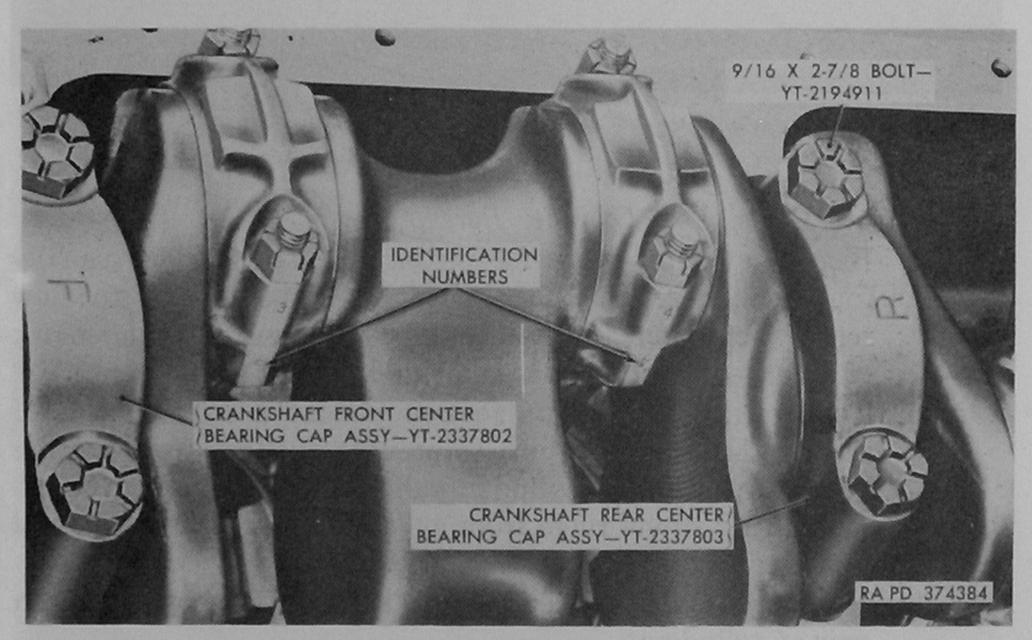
Identification markings on connecting rods and crankshaft bearing caps (late model engine shown).
